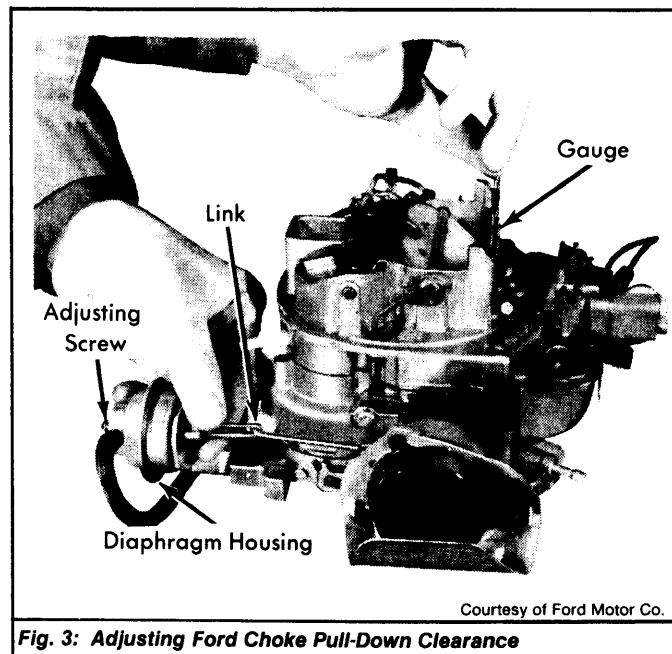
Adjusting Ford Choke Pull-Down Clearance
